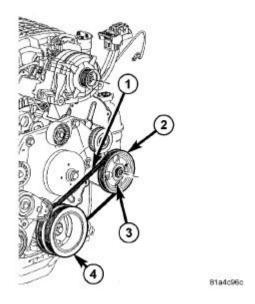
Power Steering Belt Courtesy of CHRYSLER LLC
